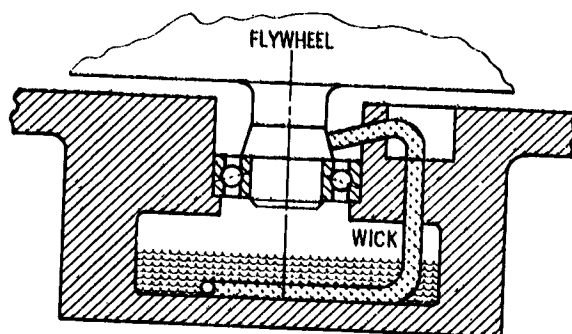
Wick lubrication of ball bearing for energy storage flywheel.
